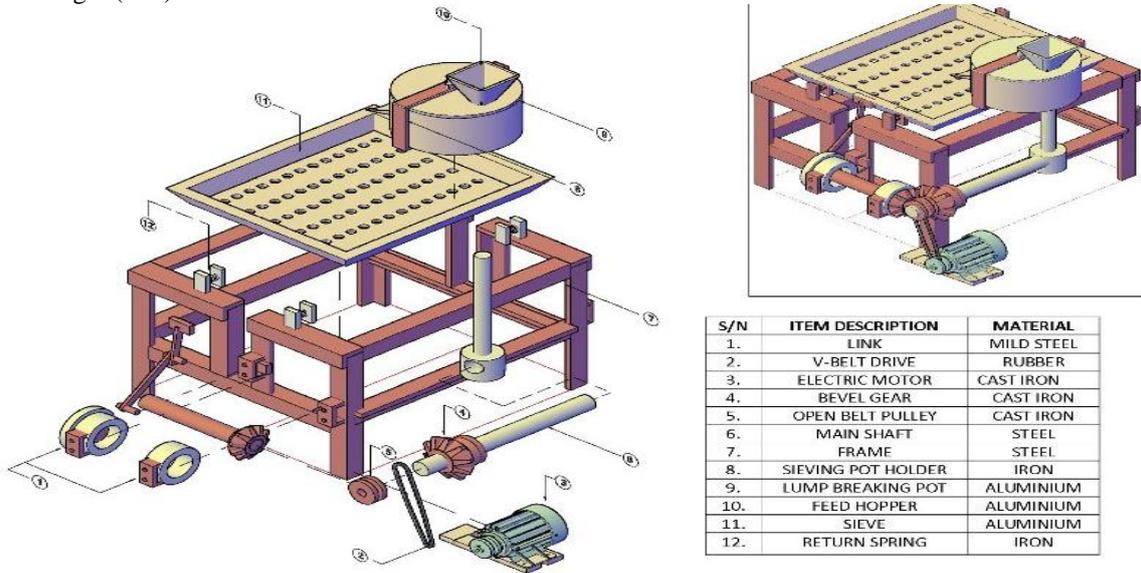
The Completed Gari Sieving Machine and an Exploded Drawing
